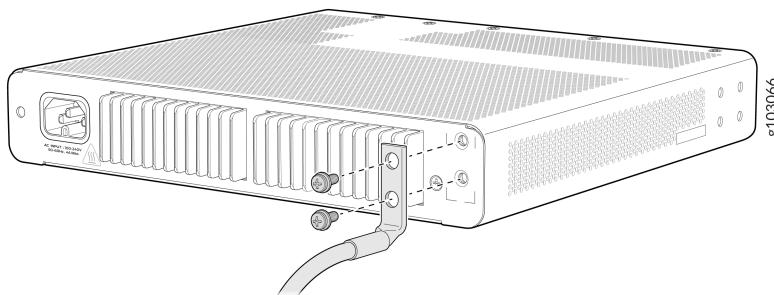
Connect a Grounding Cable to an EX4000-24P Switch
